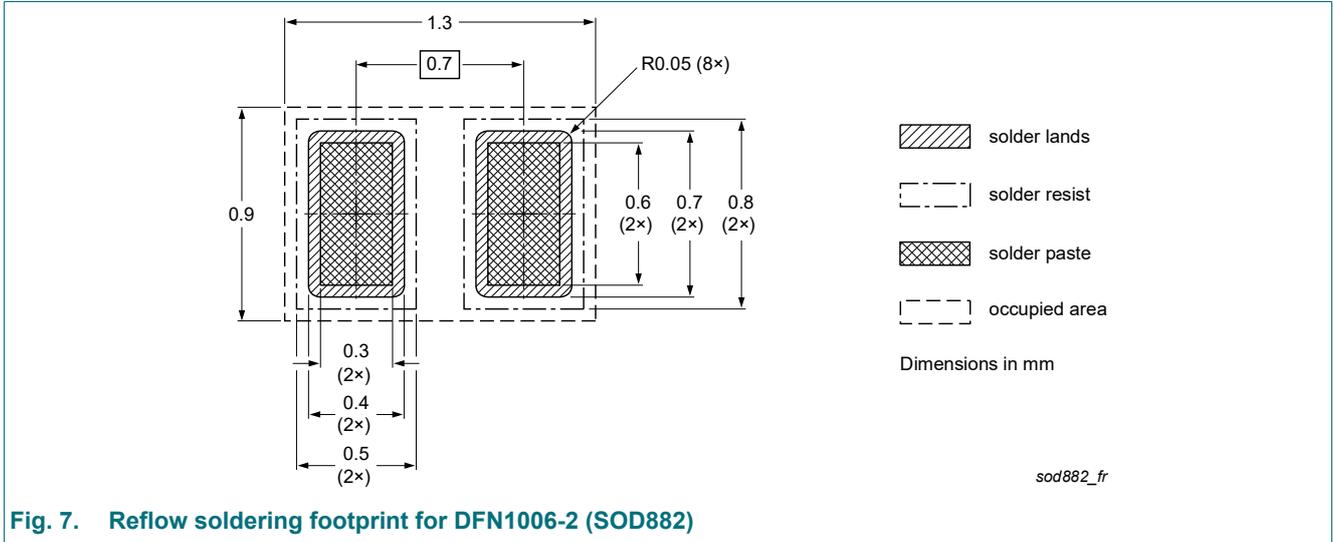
Reflow soldering footprint for DFN1006-2 (SOD882)
